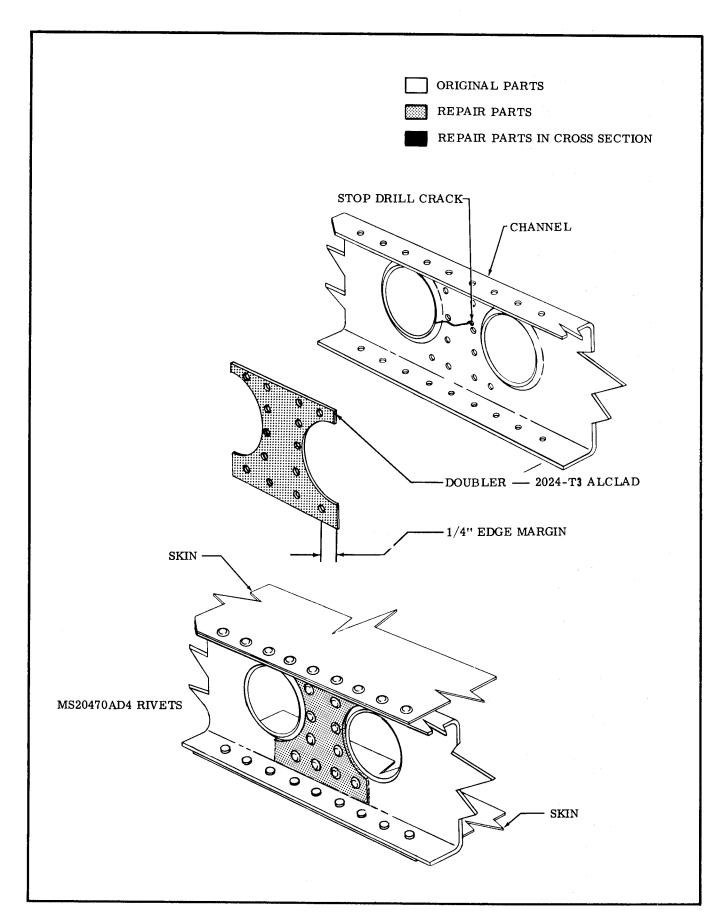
Stringer and Channel Repair (Sheet 3 of 4)
